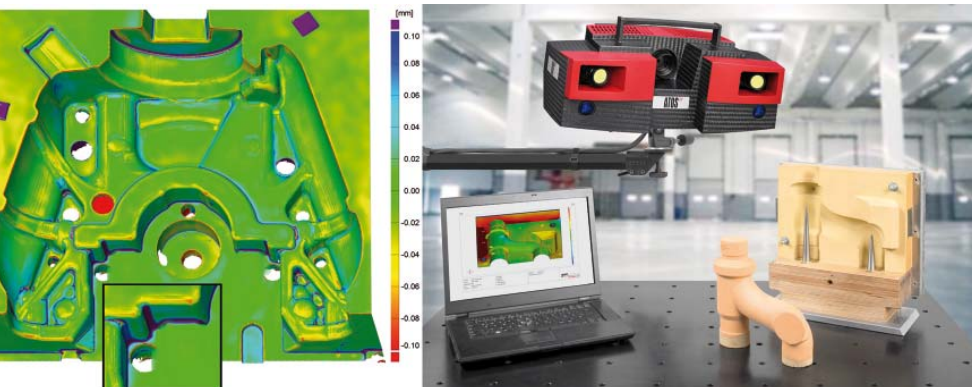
Flexible use of optical 3-D measurement: checking the milling result of a core making tool by comparing nominal and actual data, clearly reveals which edges of the tool (blue) still need to be re-machined
